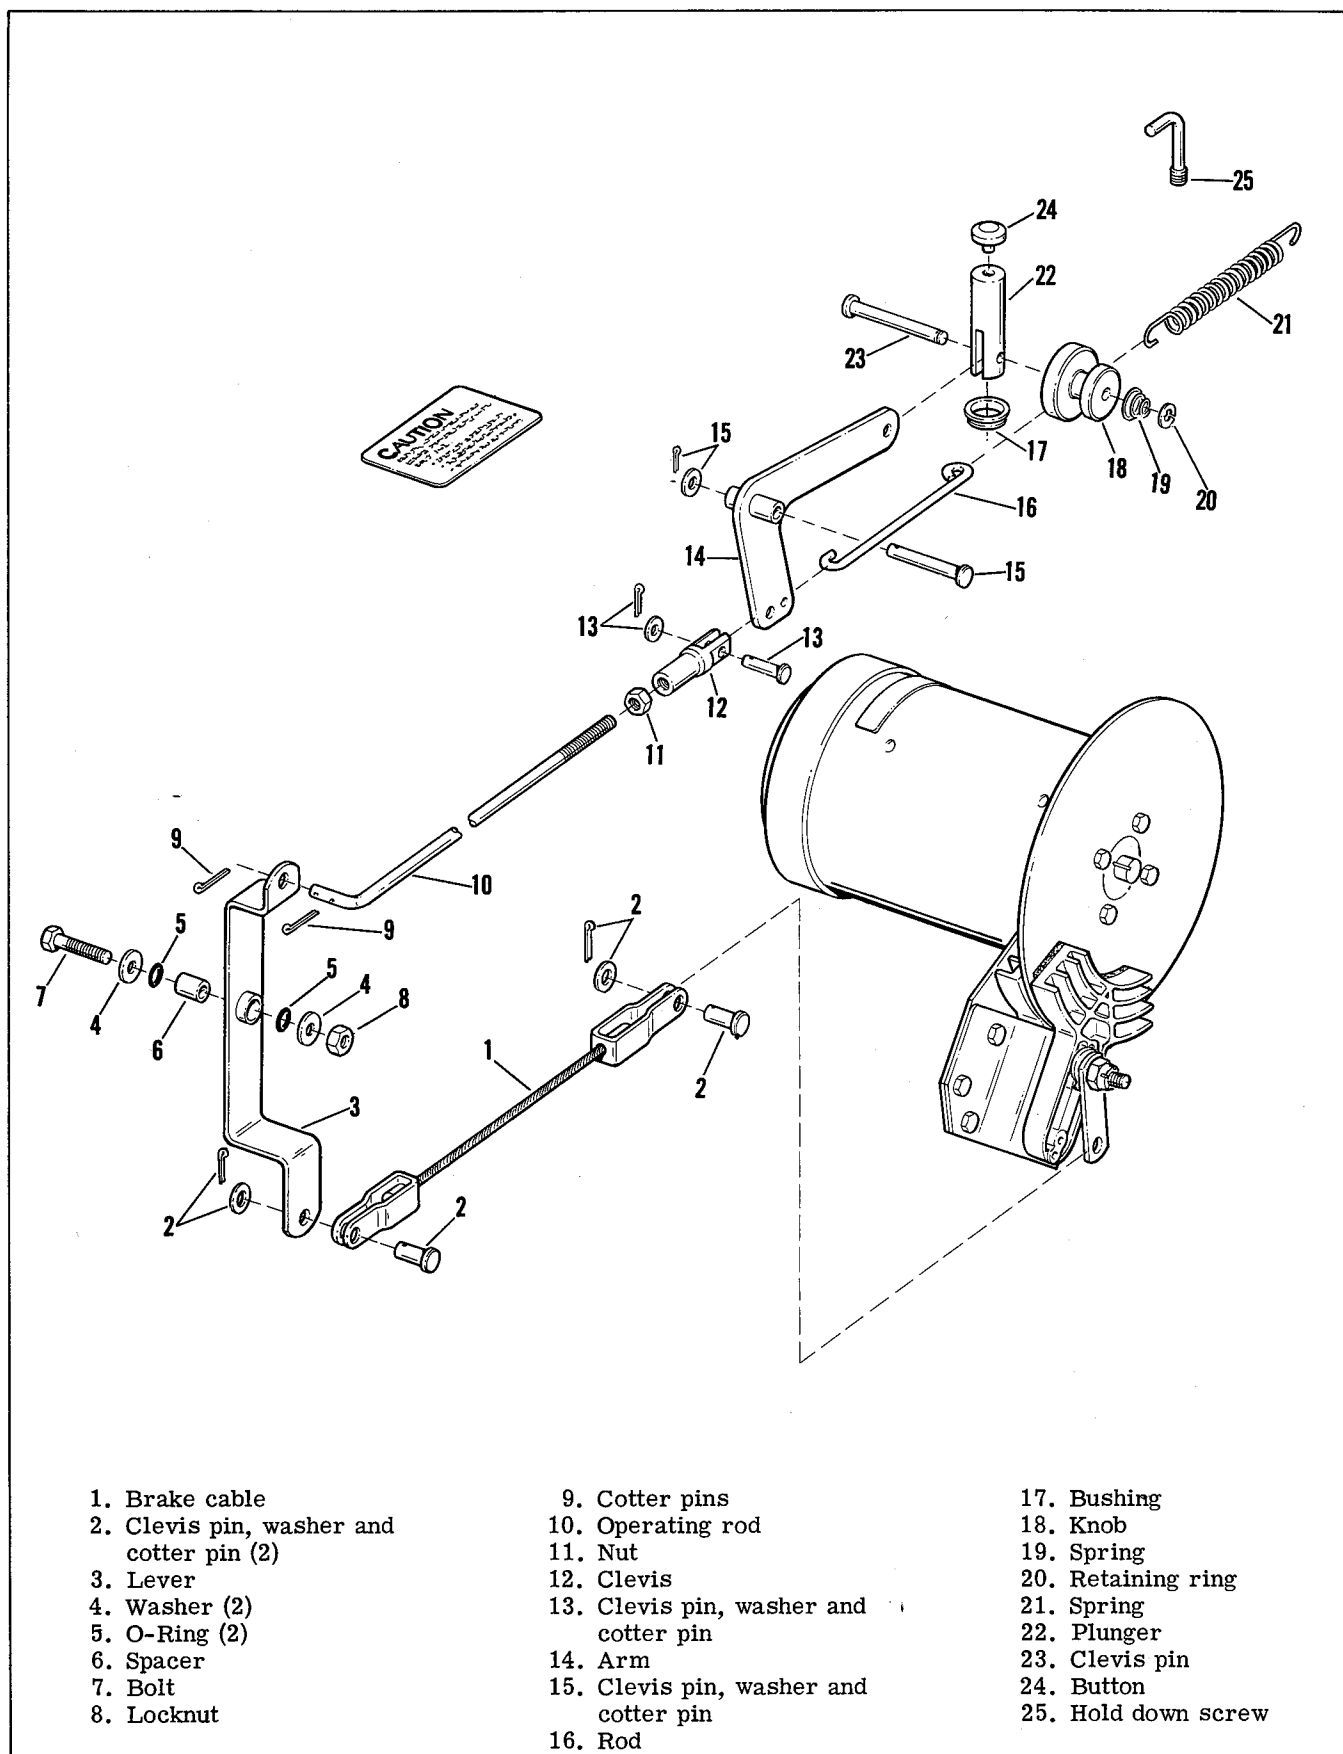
C. Automatic Seat Brake (1977 and Later)
